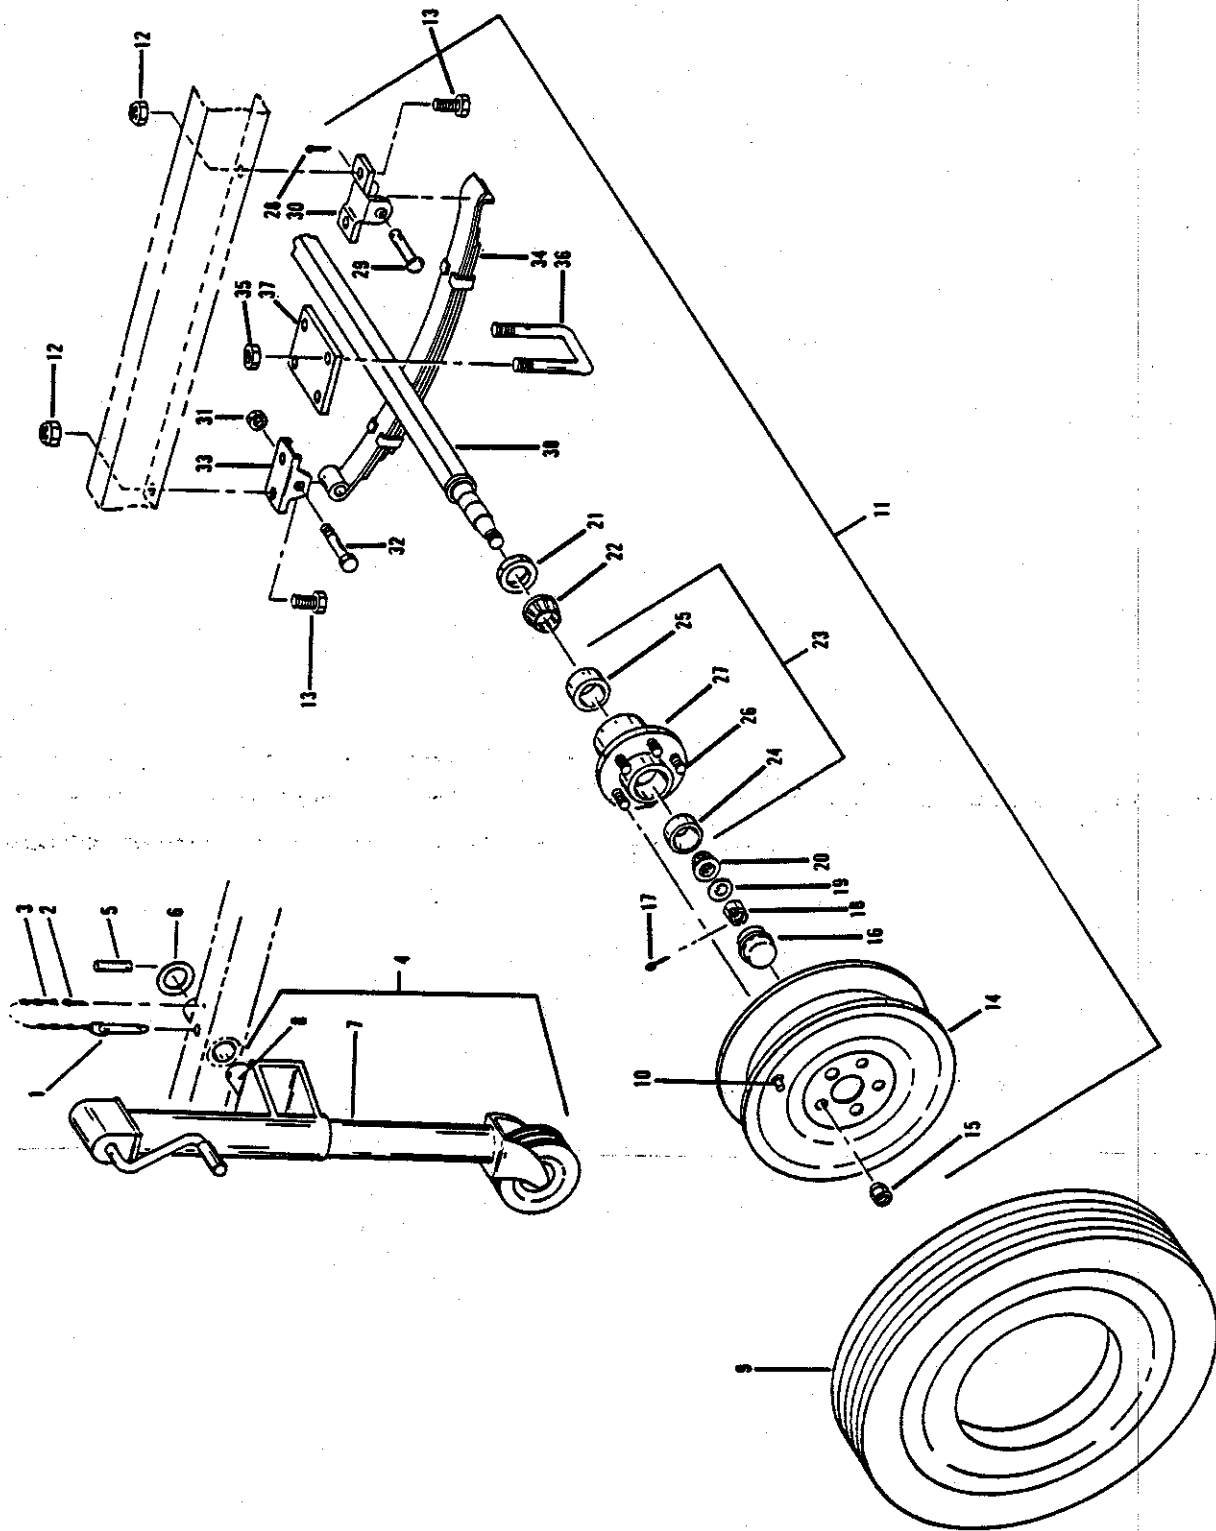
LANDING WHEEL AND AXLE ASSEMBLY
